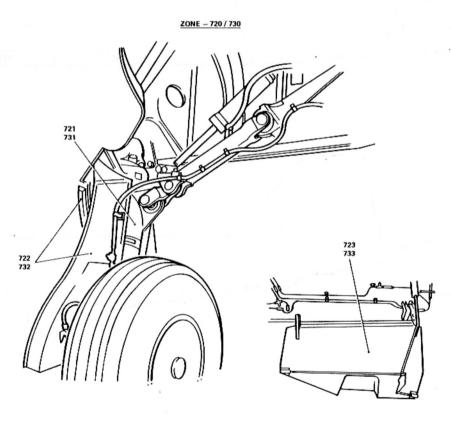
MAJOR ZONES - LANDING GEAR AND DOORS
